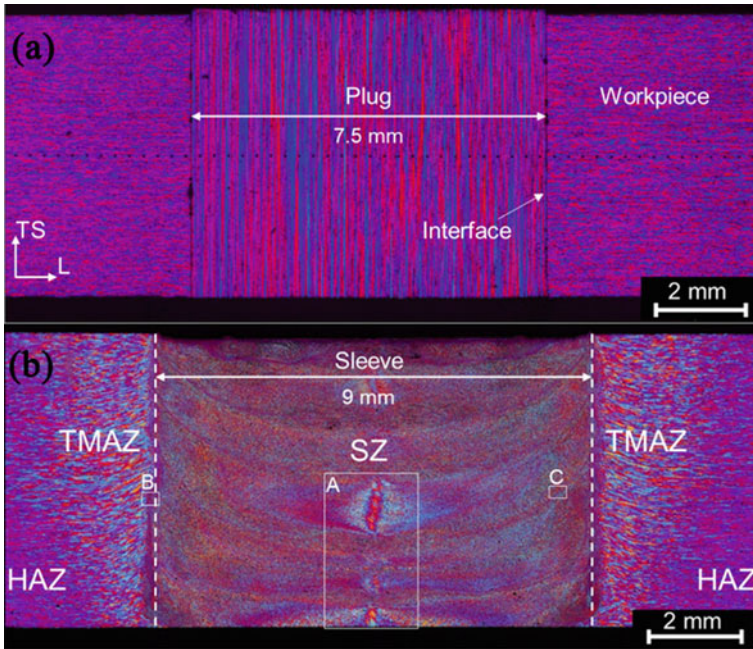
Low-magnification overviews of unwelded and welded samples: a unwelded cross-section with extruded plug and surrounding workpieces and b typical appearance of the welded sample [59]
